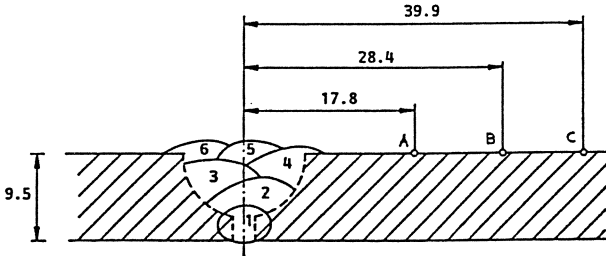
Welding of a multi-pass girth weld on a pipe with six passes. The letters A, B and C refer to the locations of the thermocouples.
